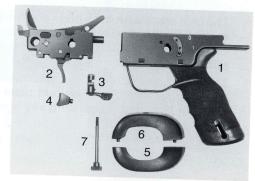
Pistol grip with trigger assembly Fig. 7: Pistol grip with trigger assembly, dismantled
